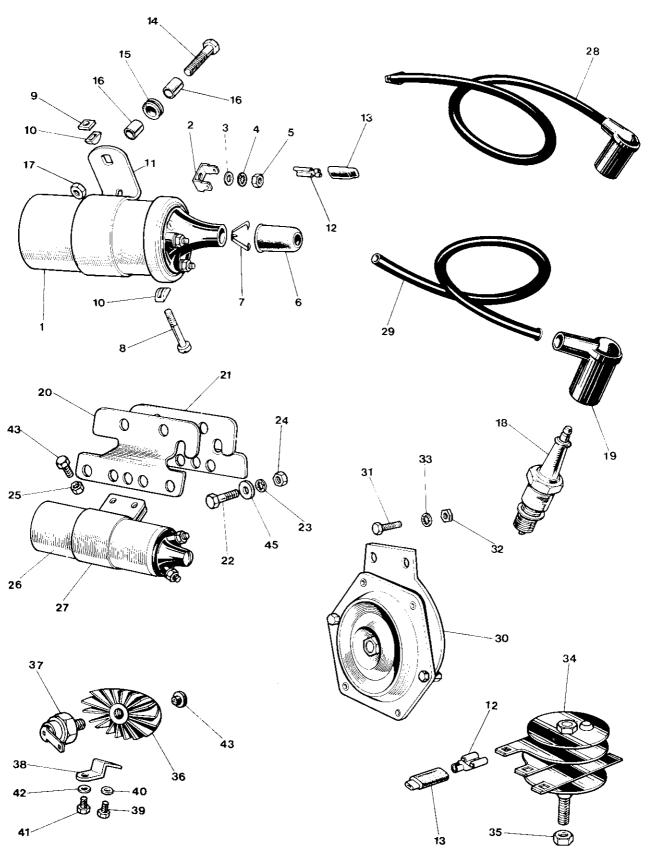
IGNITION COILS, HORN, RECTIFIER AND ZENER DIODE
